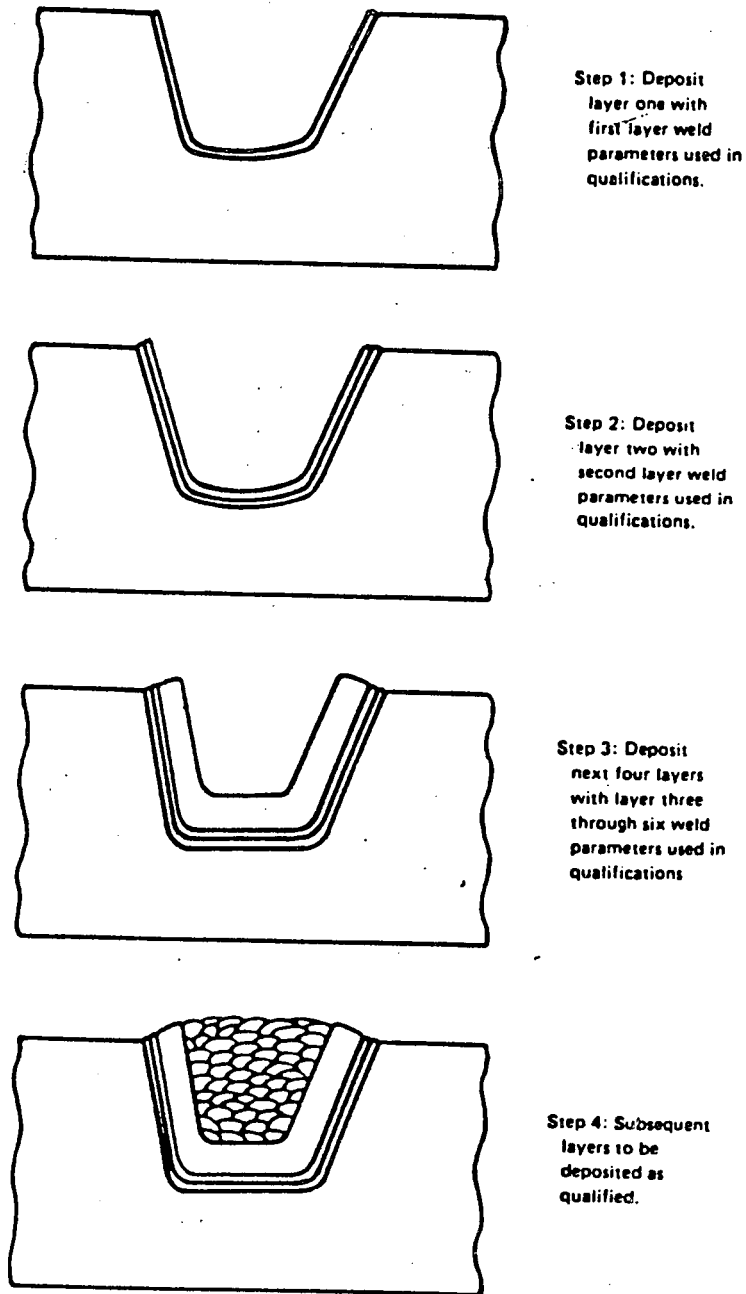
AUTOMATIC OR MACHINE (GTAW) TEMPERBEAD TECHNIQUE
